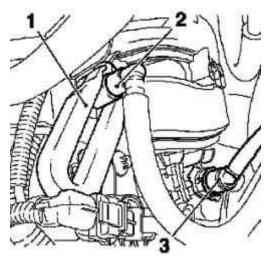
Removing the fuel line and vacuum line: 1 - a special tool, 2 - feeding the fuel line, 3 - vacuum brake booster line
